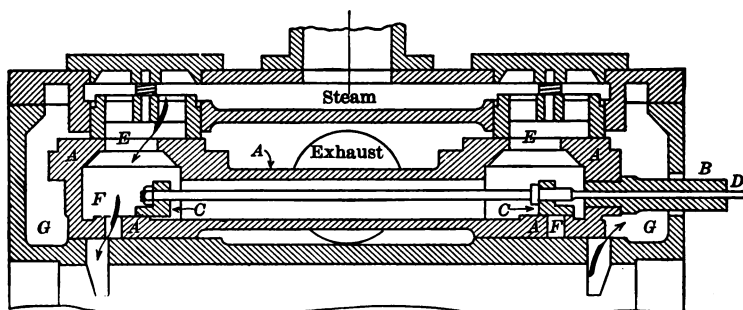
BUCKEYE FLAT CUT-OFF VALVE
